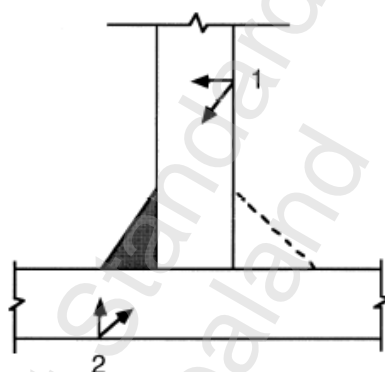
Inspection access for ultrasonic inspection of fillet welds
